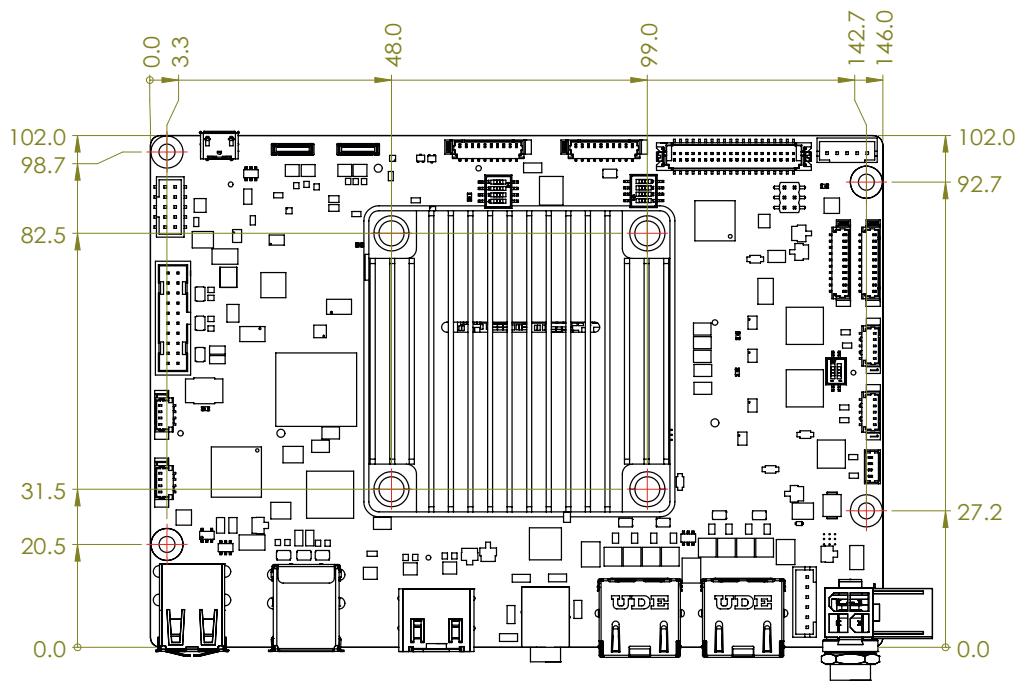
Mechanical Drawing with Heatsink (Top Side)
